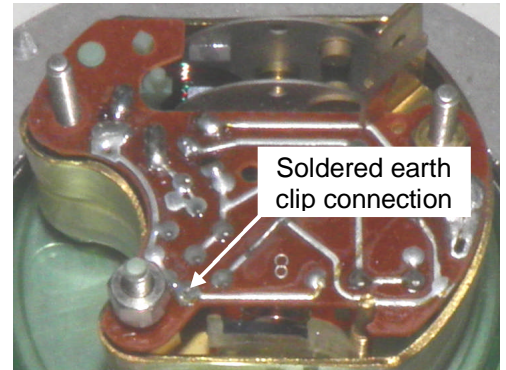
Location of earth connection. Soldered joints are poor mechanical joints so re-solder before final assembly of clock.
